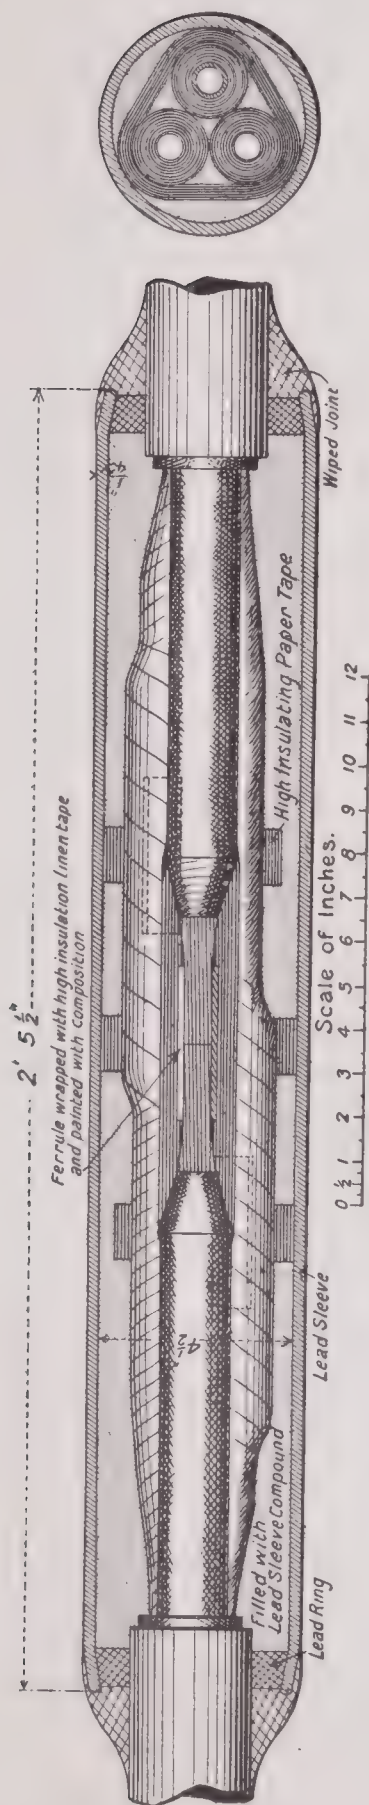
DISTRICT RAILWAY: SECTION THROUGH HIGH TENSION CABLE-JOINT.
